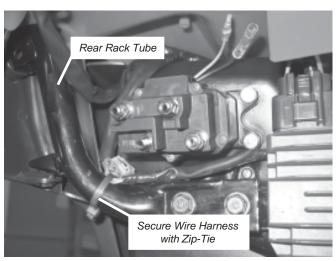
Contactor Location (TRX350) - Right Side of Tool Box
